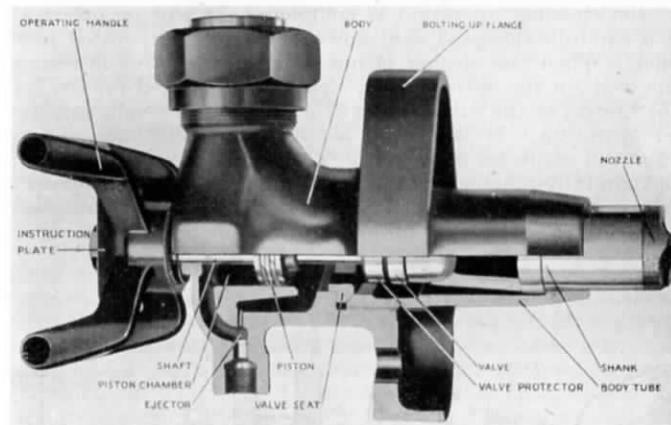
DIAMOND SOOT BLOWER: VALVE OPEN.
